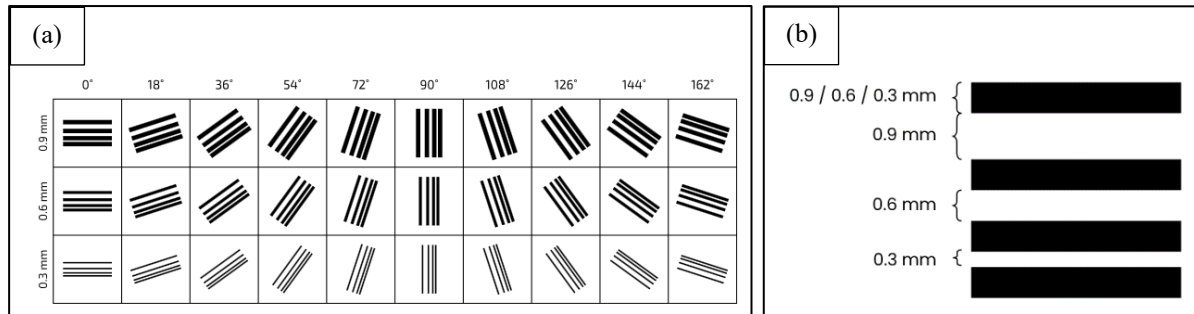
(a) The test coupon design that use for line analysis and (b) dimensions of single cell of the test coupon
